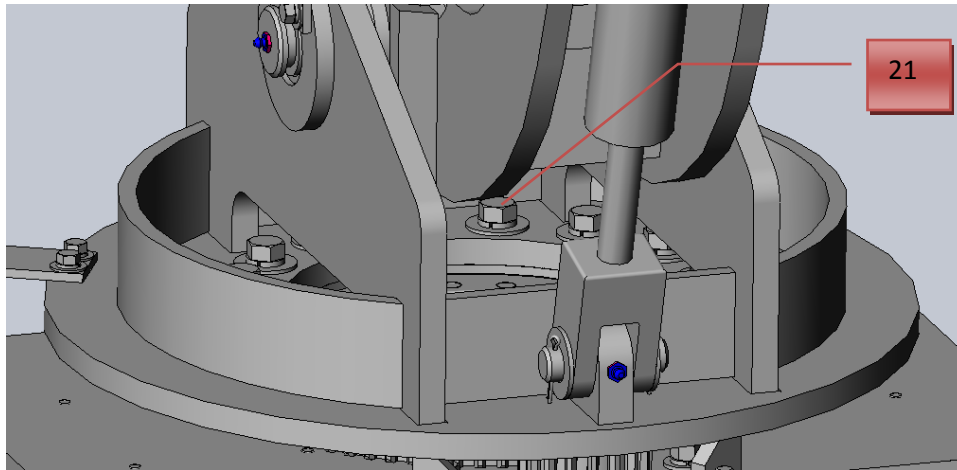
Docking Head Slew Bearing Outer Bolts Critical Failure Points
